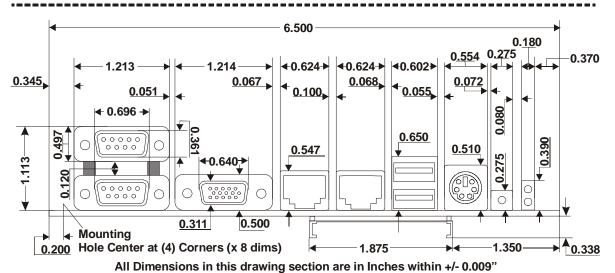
ReadyBoard 550 Dimensions (Top view)
